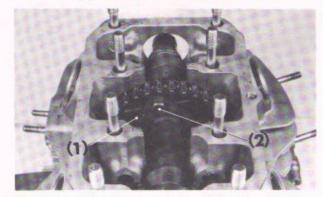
(1) Cam sprocket (2) Knock bolt
